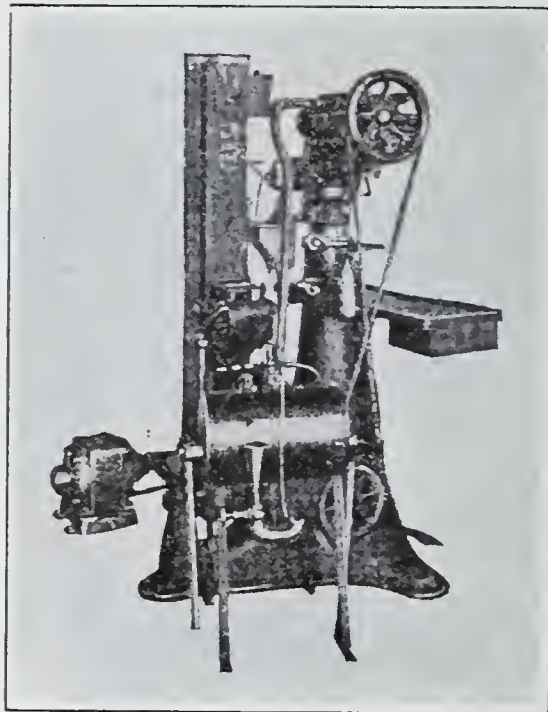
G. E. Steam-Boiler Applied to Shoe-Stitching Machine.
